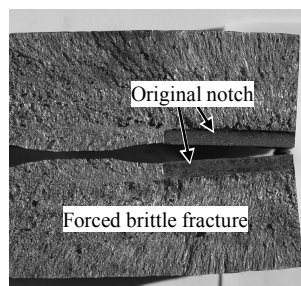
CWP-1: A view on the electrical discharge machined notch after forced brittle fracture does not indicate ductile tearing.
